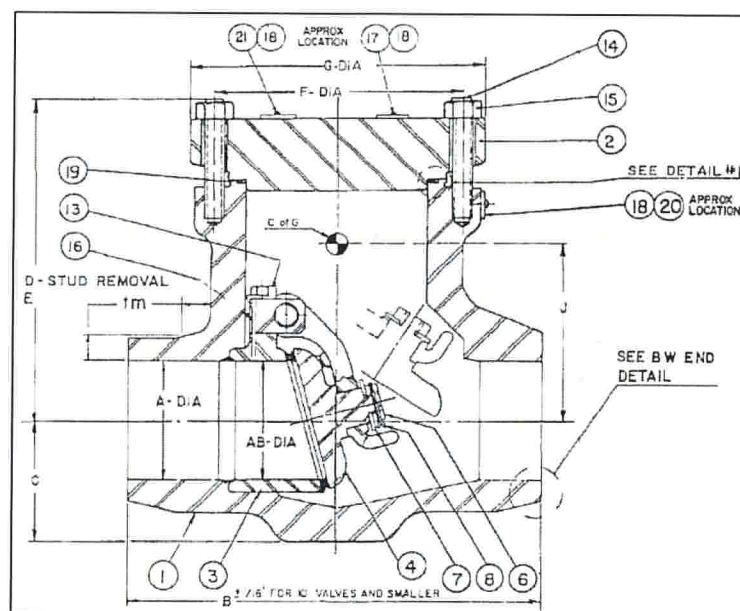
KCV0478 Design Drawing Side View (M-223C-00021)
